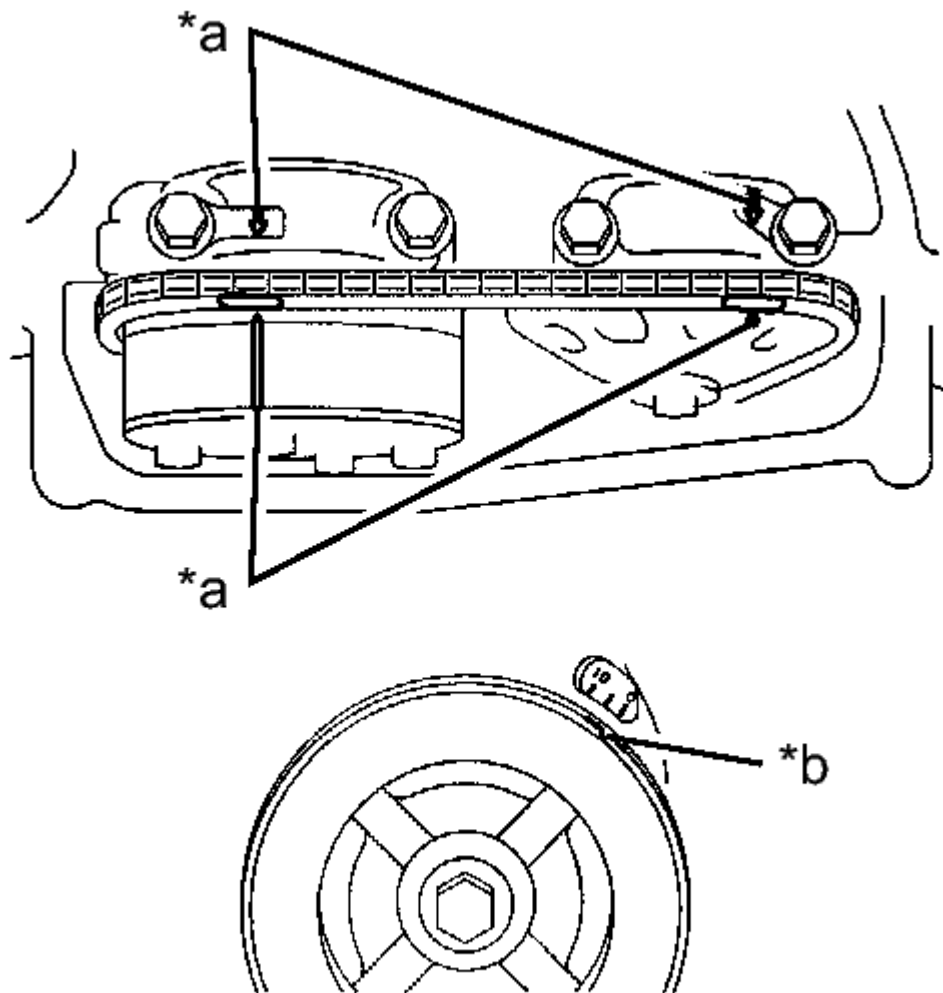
Setting No. 1 Cylinder To Tdc / Compression
